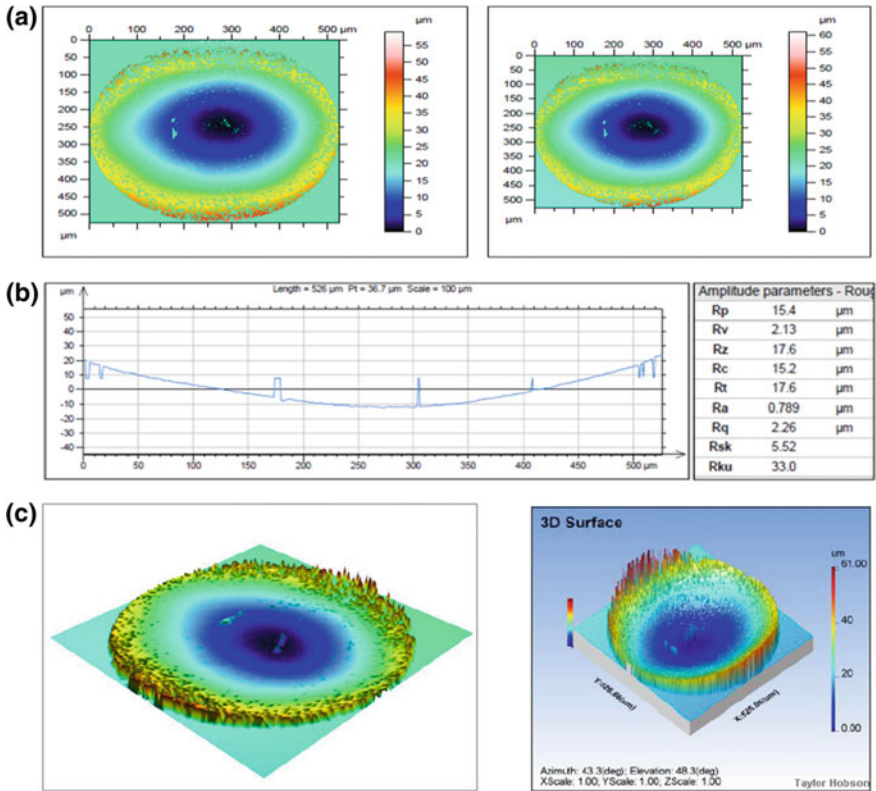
Sample reading of non-contact surface roughness tester a 2D view pseudo-colour surface map, b surface profile with sample length and surface parameters and c 3D and advanced 3D views of surface topography
